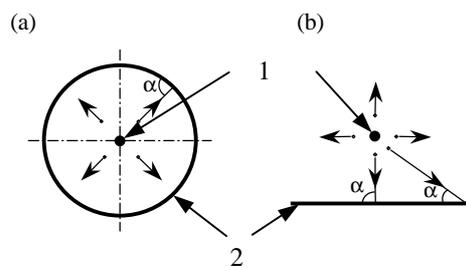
Coating of internal cylinder (a) and plane profile (b) surfaces by EWES: 1 – sprayed wire, 2 – part.
